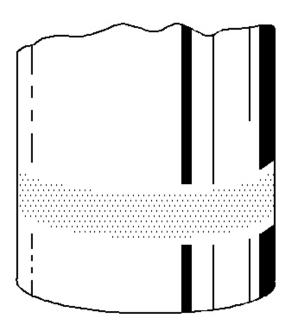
Identifying Frettage Courtesy of GENERAL MOTORS CORP.
